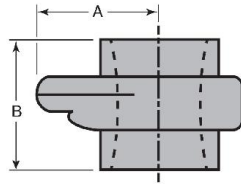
Butt Weld Schedule 160 and XXH
